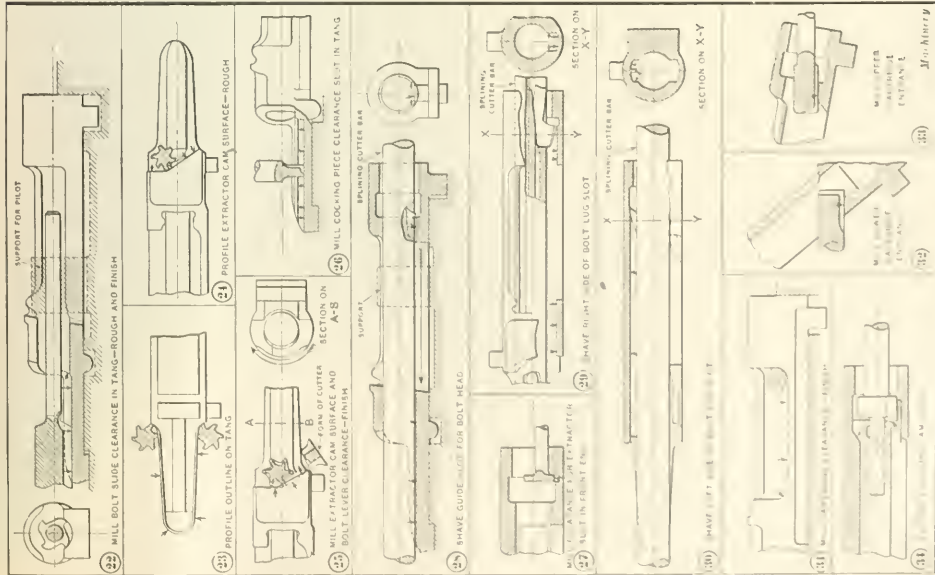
Machining Operations on Spanish Mauser Receiver (Continued)
